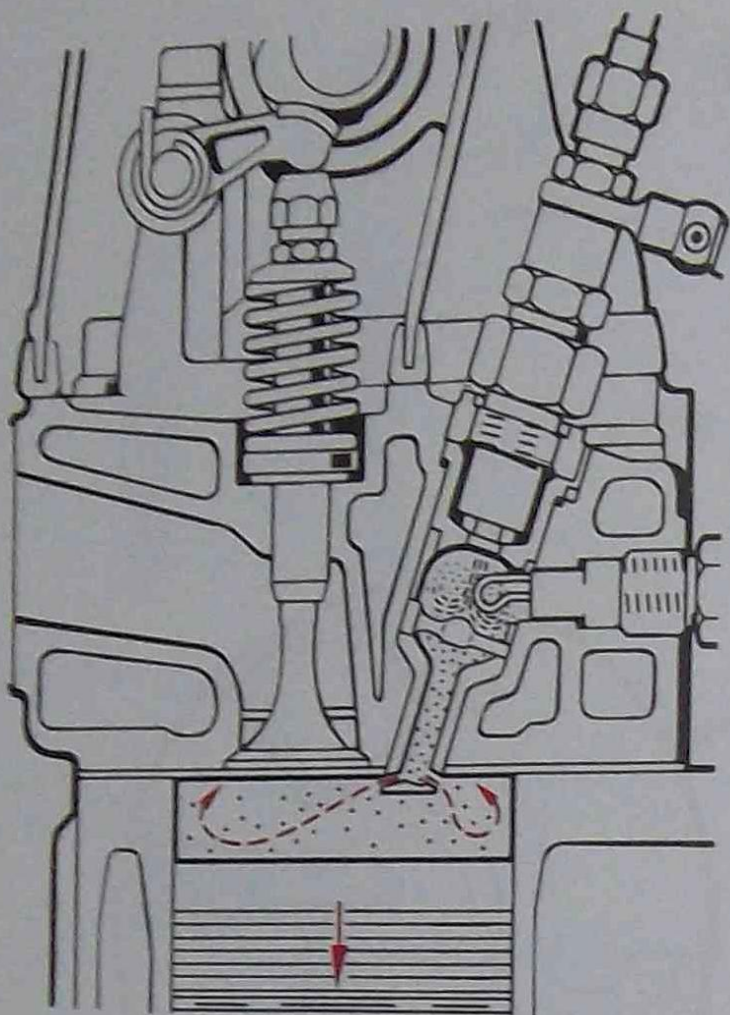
Precombustion chamber; the injector sprays fuel into a small combustion chamber in the cylinder head which is fitted with a glow plug for starting purposes MERCEDES
